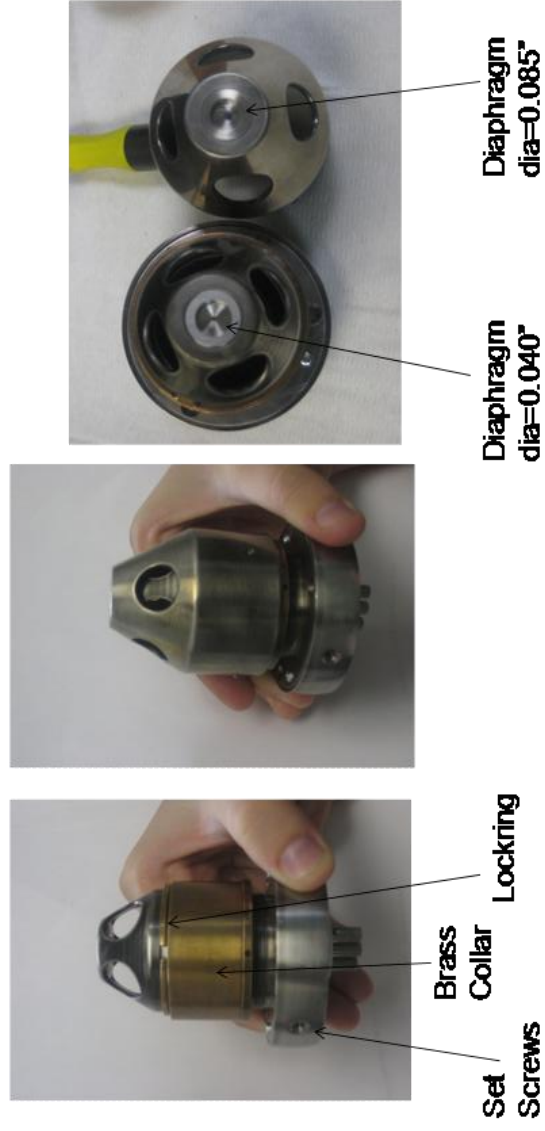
Completing the source assembly with final adjustments of extractor cap.
